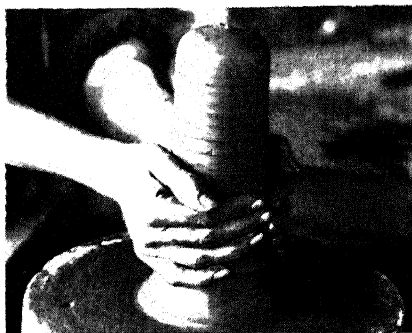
The second step in throwing is the drawing up and compressing of the clay to get rid of all air pockets. Note the position of the hands and that pressure is from the lower part of the palm, working evenly and steadily to the top. Continue upward with a slow, even movement, slightly releasing pressure when the top is reached. Press the clay back with the right hand on top and the left hand as a guide on the side, moving down until the center mound is again formed. Repeat the process until the clay is in good condition and free from holes.
